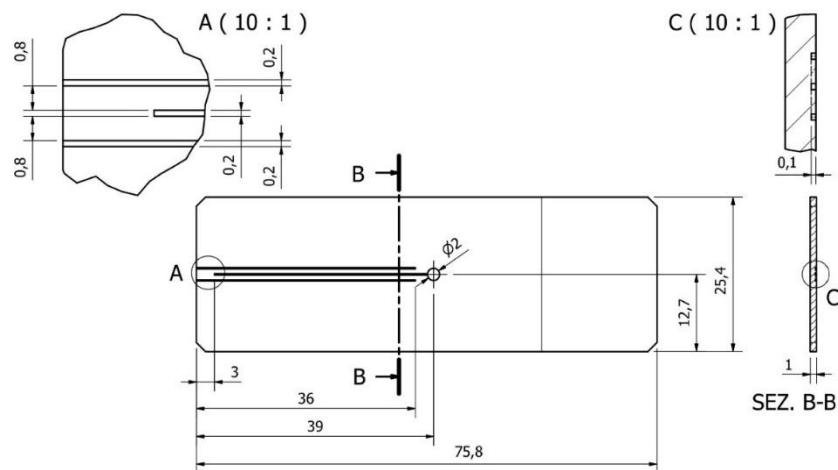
ISO technical drawing of the glass layer with dimensions in [mm]
